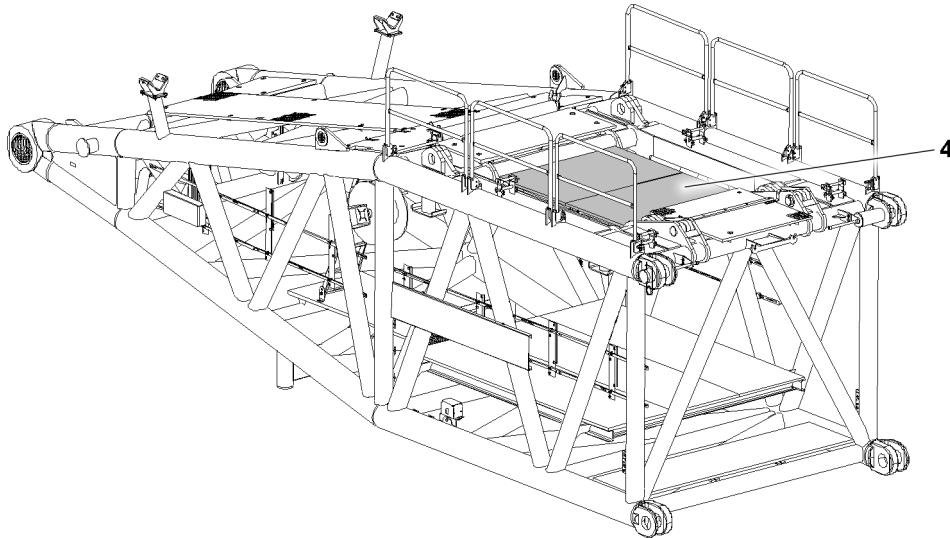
Assembling the assembly pedestal in the transport position — assembly pedestal
